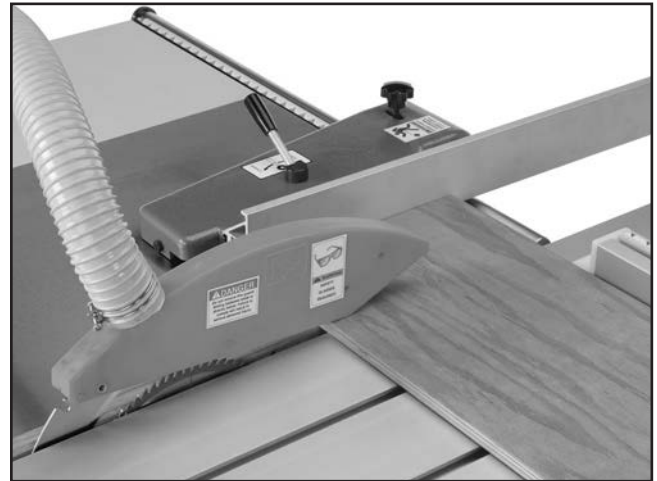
Crosscutting workpieces using the rip fence as a cut-off gauge.
